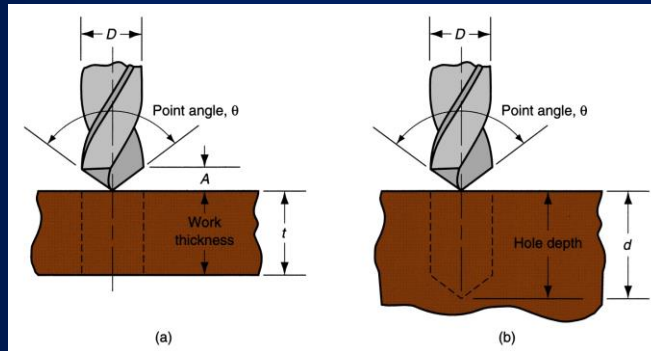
Two hole types: (a) through-hole, and (b) blind hole
